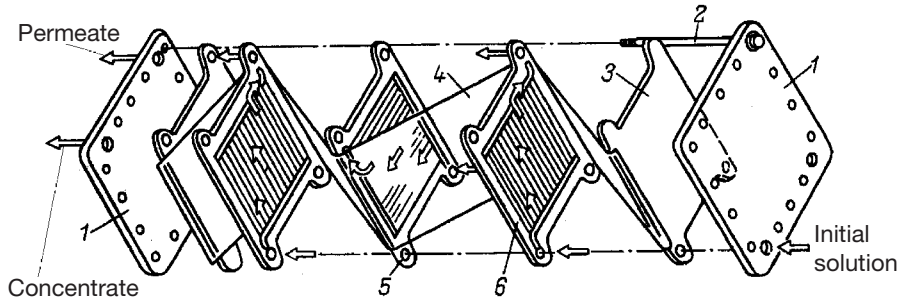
Filter press flat sheet membranes: (1) flanges, (2) tightening bolt, (3) strong plate, (4) membrane, (5) drainage plate, (6) separating plate.
